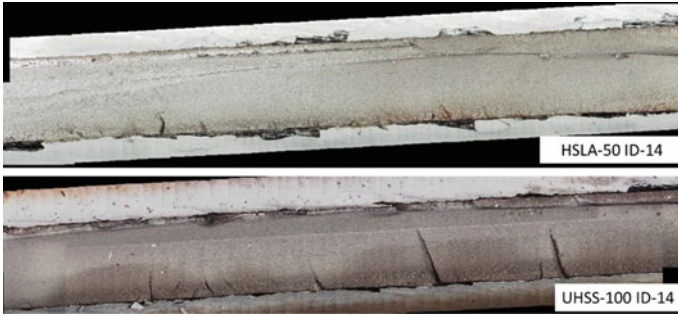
Fractured surface showing fatigue crack growth through the critical weld toe crack plane for HSLA-50 ID-14 and UHSS-100 ID-14 welded samples
